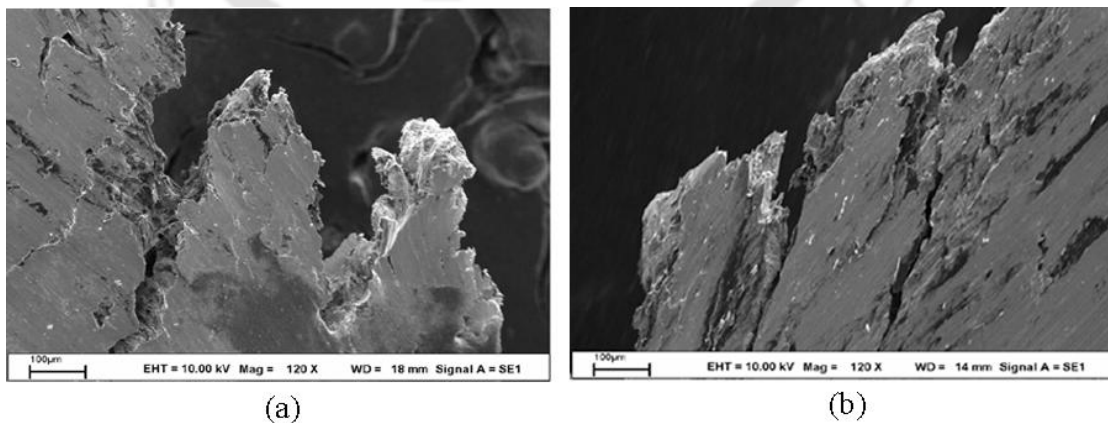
Chip segmentation formation generated (a) From the front cutting tool (0.24 mm/rev feed and 1 mm depth of cut) and (b) From the rear cutting tool (0.24 mm/rev feed and 1 mm depth of cut)
